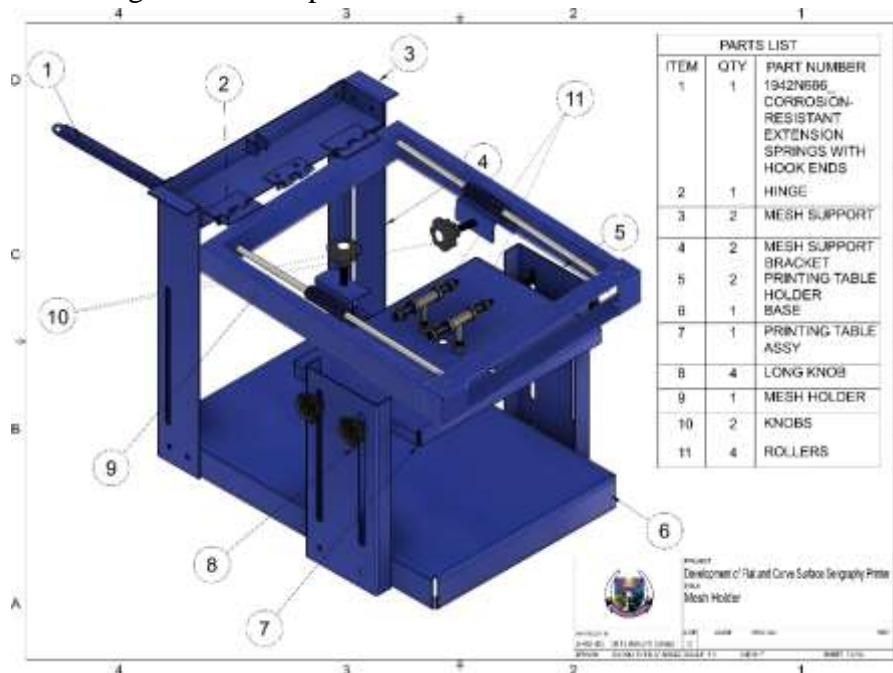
3D Model of the Serigraphy Printer for flat and curved surfaces with labeling.
